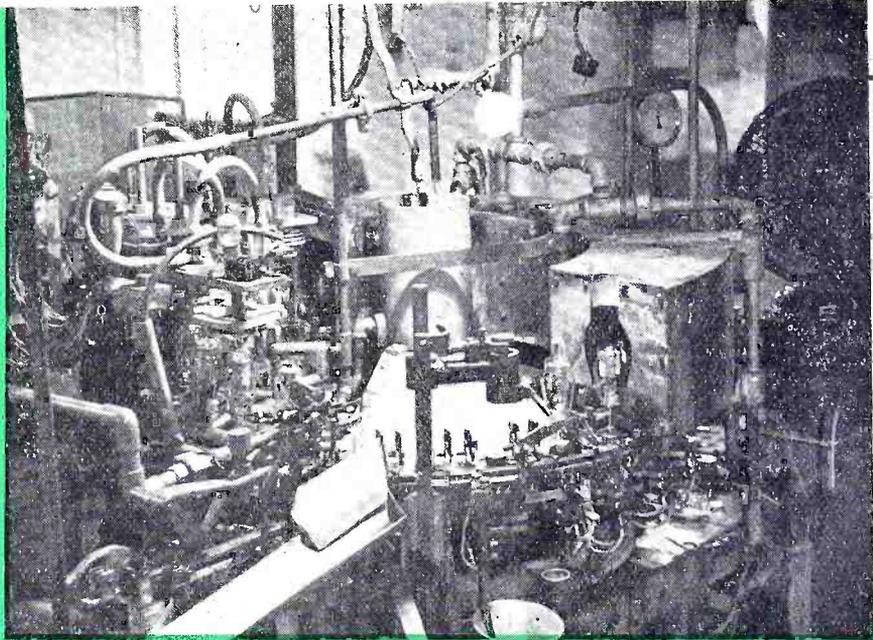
24-head automatic rotating pump with heating oven and H.F. heater for degassing electrodes during pumping
